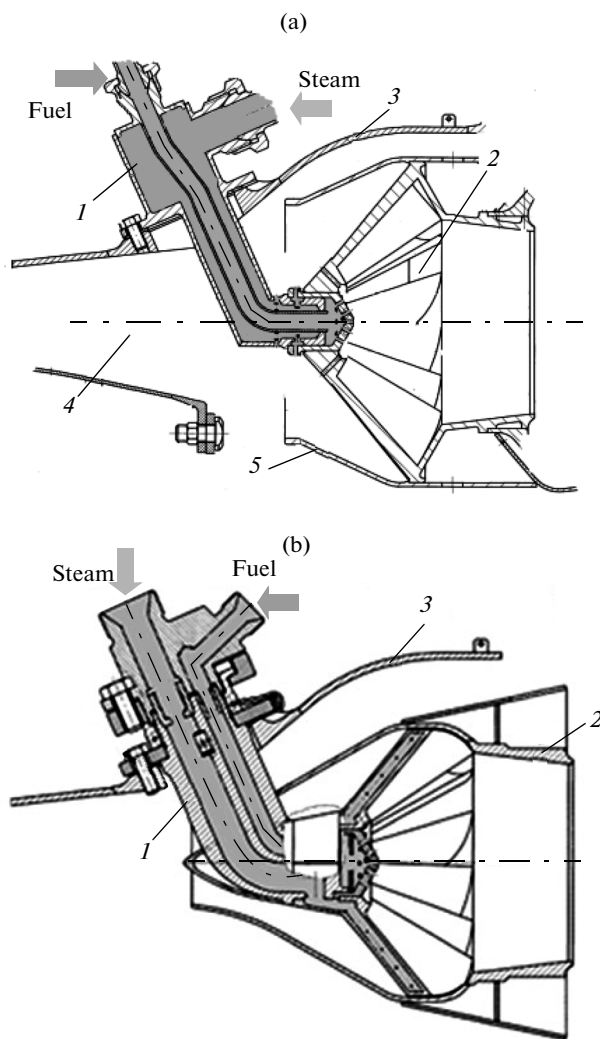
Versions of front devices used in straight-flow EFCCs operating on gaseous fuel with steam injection. (a) Before modification of the steam admission assembly, (b) after modification of the steam admission assembly; (1) fuel nozzle, (2) swirler, (3) sealed casing, (4) diffuser, and (5) flame tube intake-fairing device.
